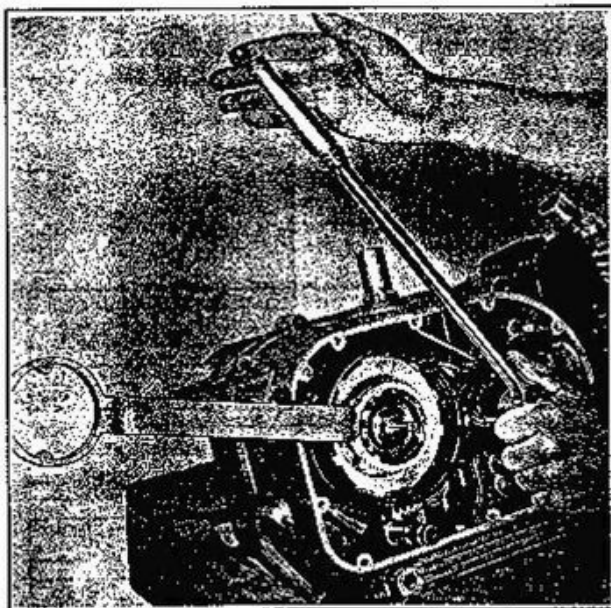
D-36. Removing and Installing Pinion Gear Nut (1968 & Earlier)
